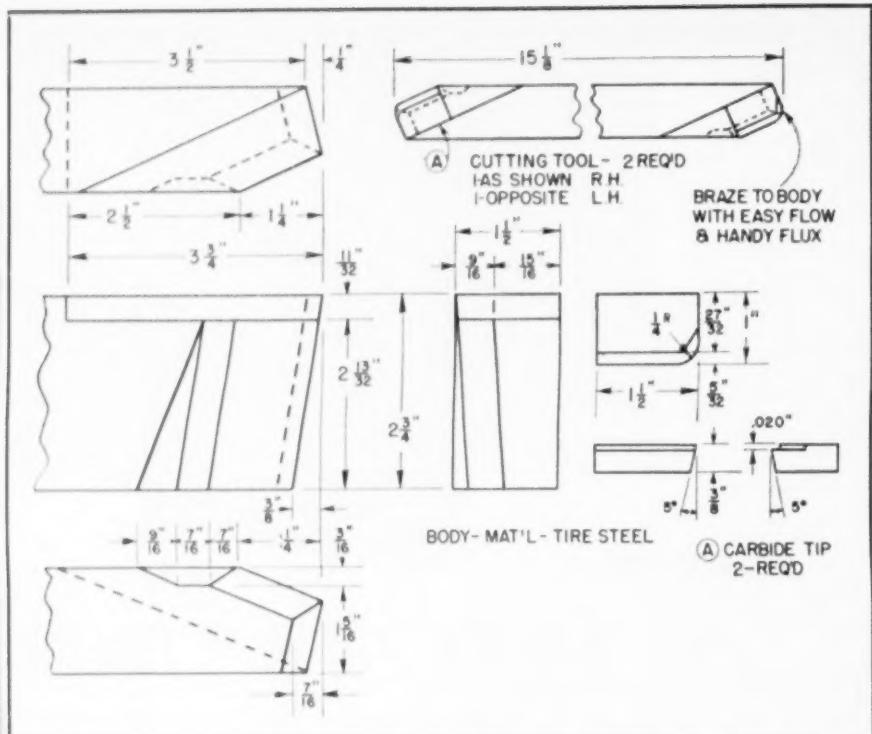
Drawing of cutting tools which have been developed especially for use in the re-turning of rail car wheels.
